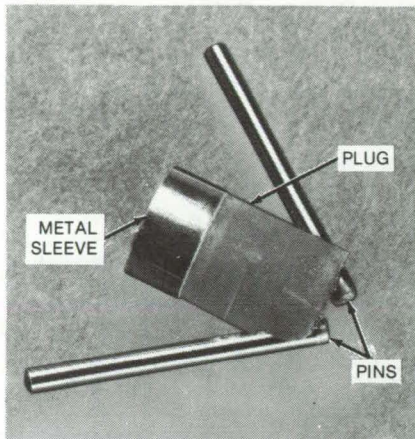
Steel Pins on a Rubber Plug conform to the flared end when the plug is inserted in a tube. The fixture dimensions for 1/4-in. (0.63-cm) tubing are: plug length, 1/2 in. (1.27 cm); plug diameter, 0.05 in. (0.13 cm) less than the maximum flare diameter; pin length, 0.75 in. (1.9 cm); pin diameter, 0.062 in. (0.16 cm); and centerline hole diameter, 0.025 in. (0.063 cm). The tool dimensions can be scaled for other tube sizes.
